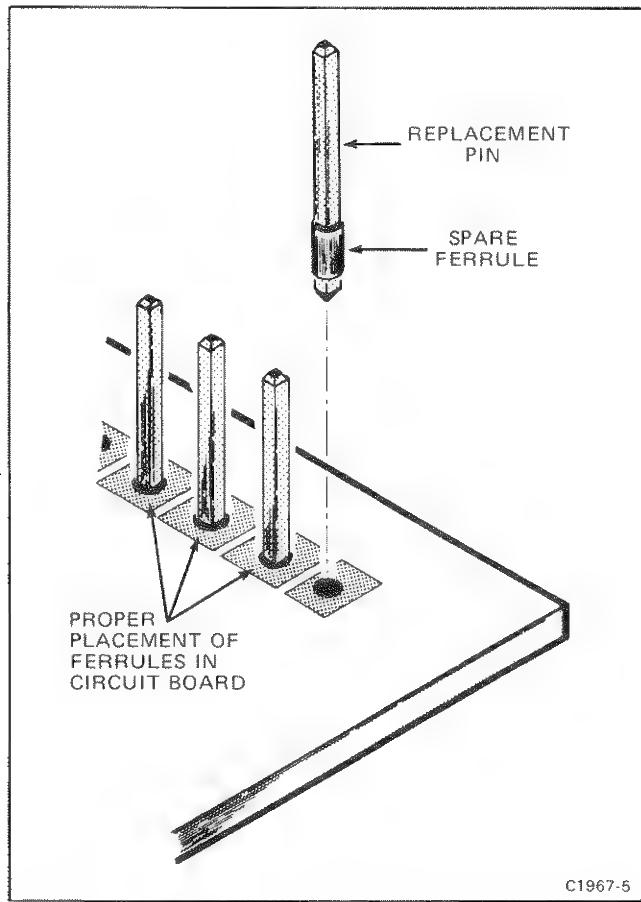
Exploded view of circuit-board pin and ferrule.
